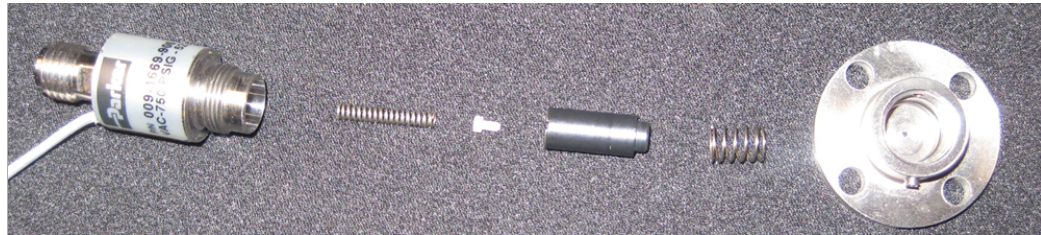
Exploded view of Parker 009-1669-900 Pulse Valve. Parts from left to right: coil, load spring, poppet, armature, buffer spring, body.
